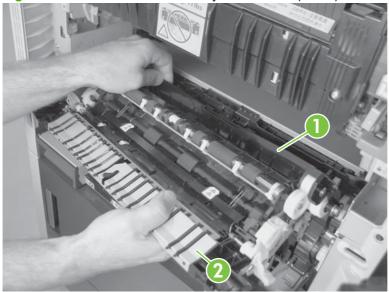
Remove the secondary transfer unit (8 of 9)
